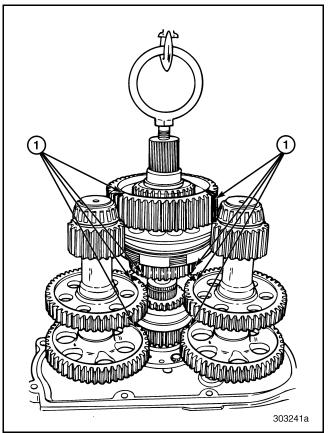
Installing Rear Mainshaft and Synchronizer Assembly (T313LR/T318LR Shown)
